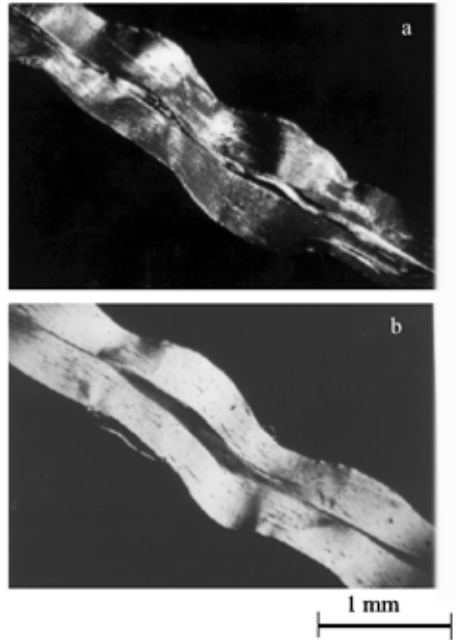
(a) - Example of a bad weld ($T_S=340^\circ\text{C}$). (b) - Example of a good weld ($T_S=370^\circ\text{C}$).
